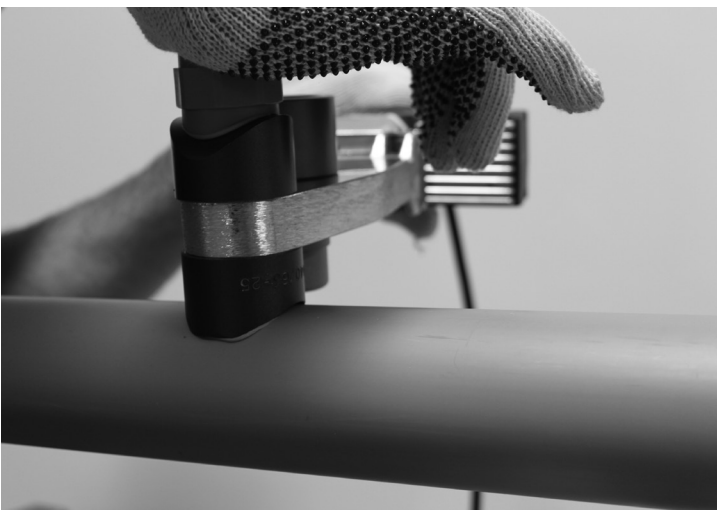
Insert the male tool bushing into the drilled hole while pushing the fitting spigot into the female tool bushing. The heating time for all dimensions is about 30 seconds.
